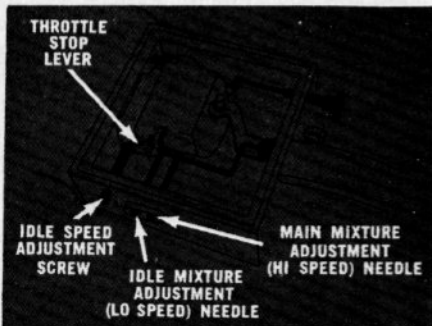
Drawing showing locations of fuel mixture adjustment needles, idle speed needle and throttle stop lever.
